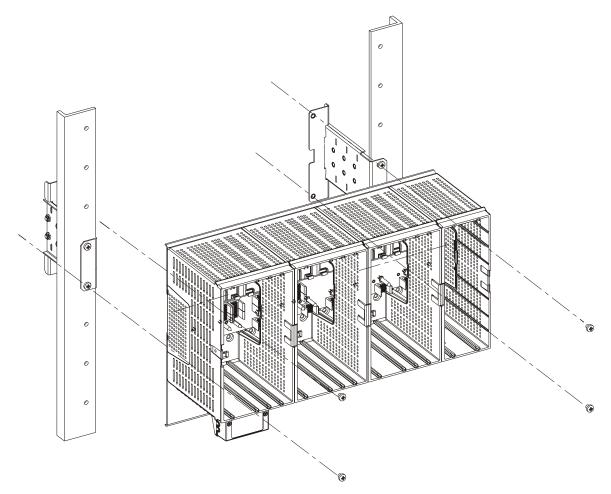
Installation of ACE3600 RTU 19" Rack- Exploded View
